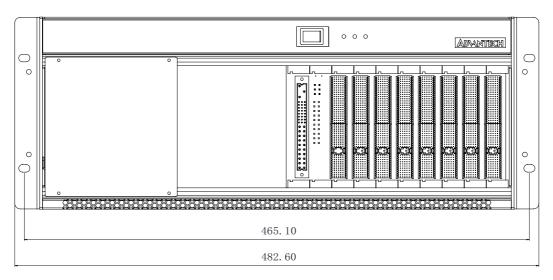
MIC-3022 Enclosure Mechanical Drawing
